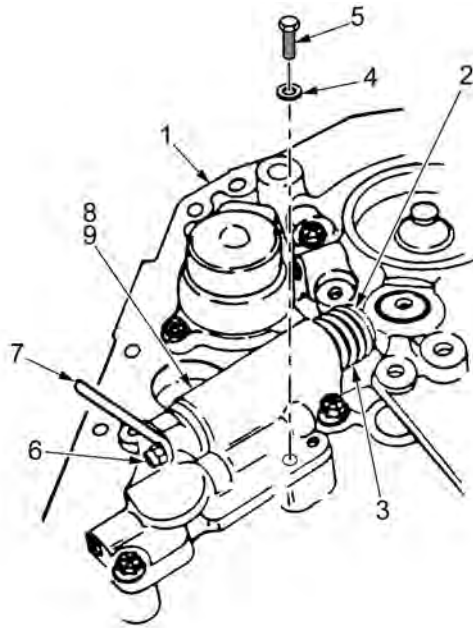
Brake Apply Regulator Valve Assembly Removal.
